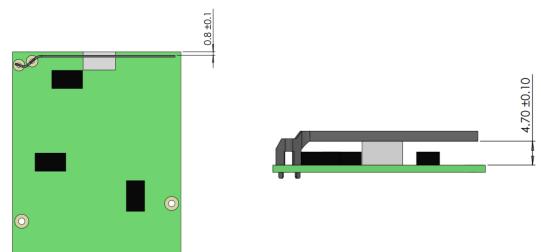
Top view of main PCBA with recommended distance from PCB edge
